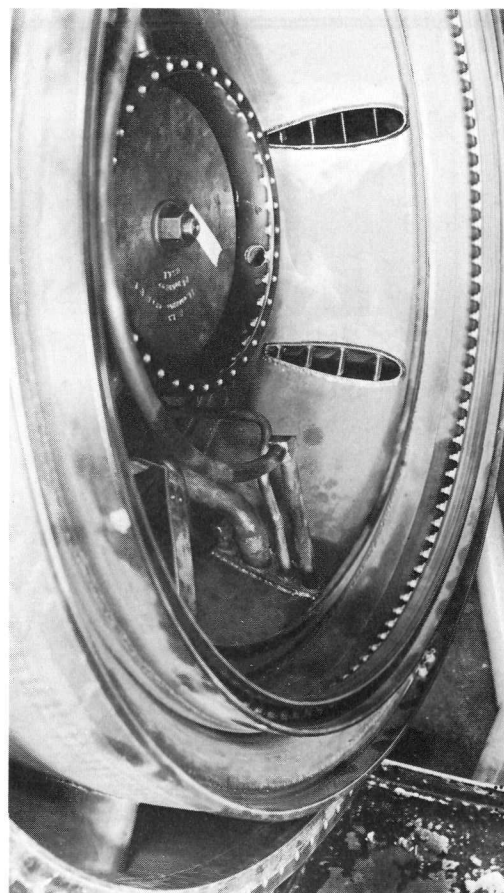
Compressor rear frame assembly (Neg. 247086)
